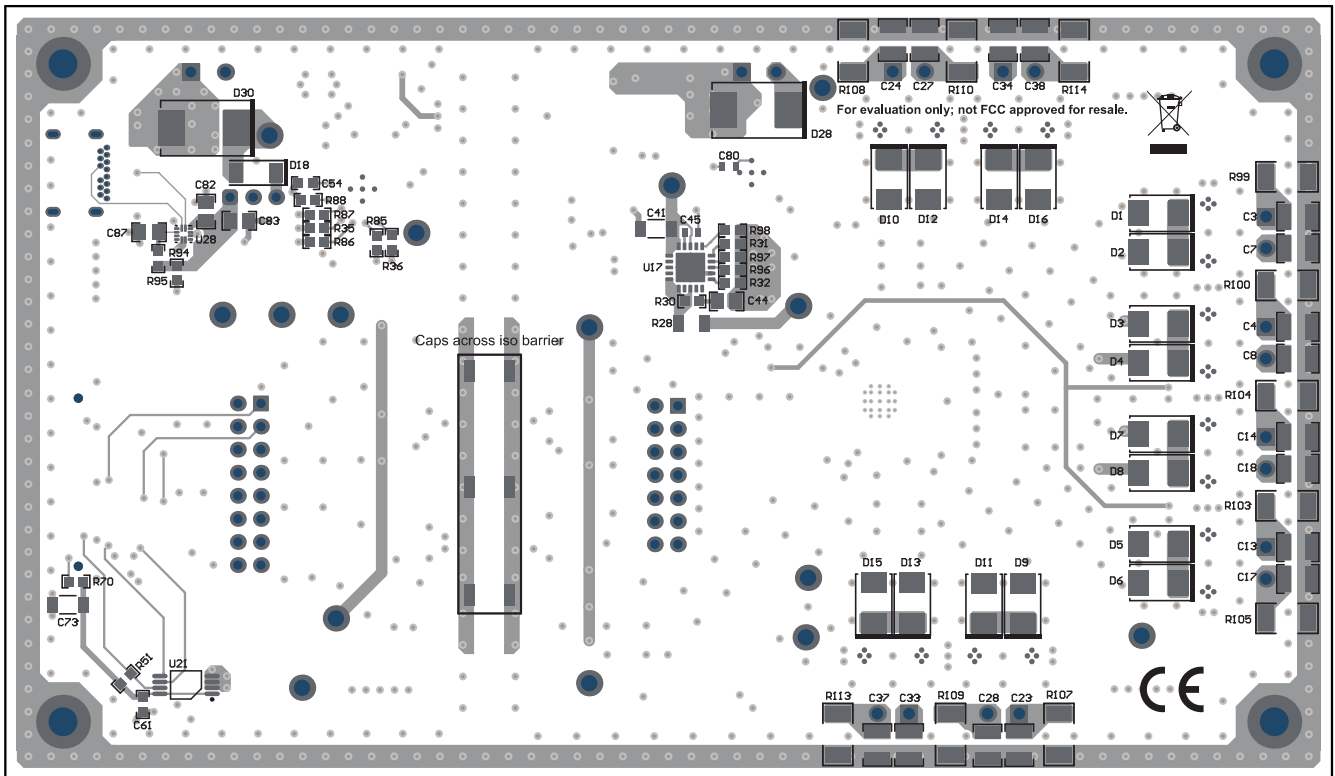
ADS125H18 EMC Test Board Bottom Layer with Silkscreen
